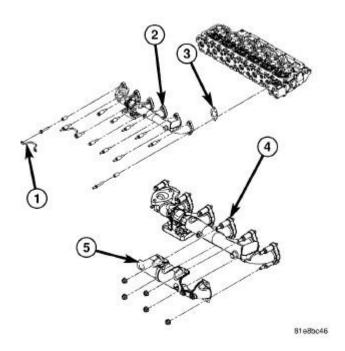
Exhaust Manifold, Gasket, Heat Shield, Retainer & Bolts Courtesy of CHRYSLER GROUP, LLC
